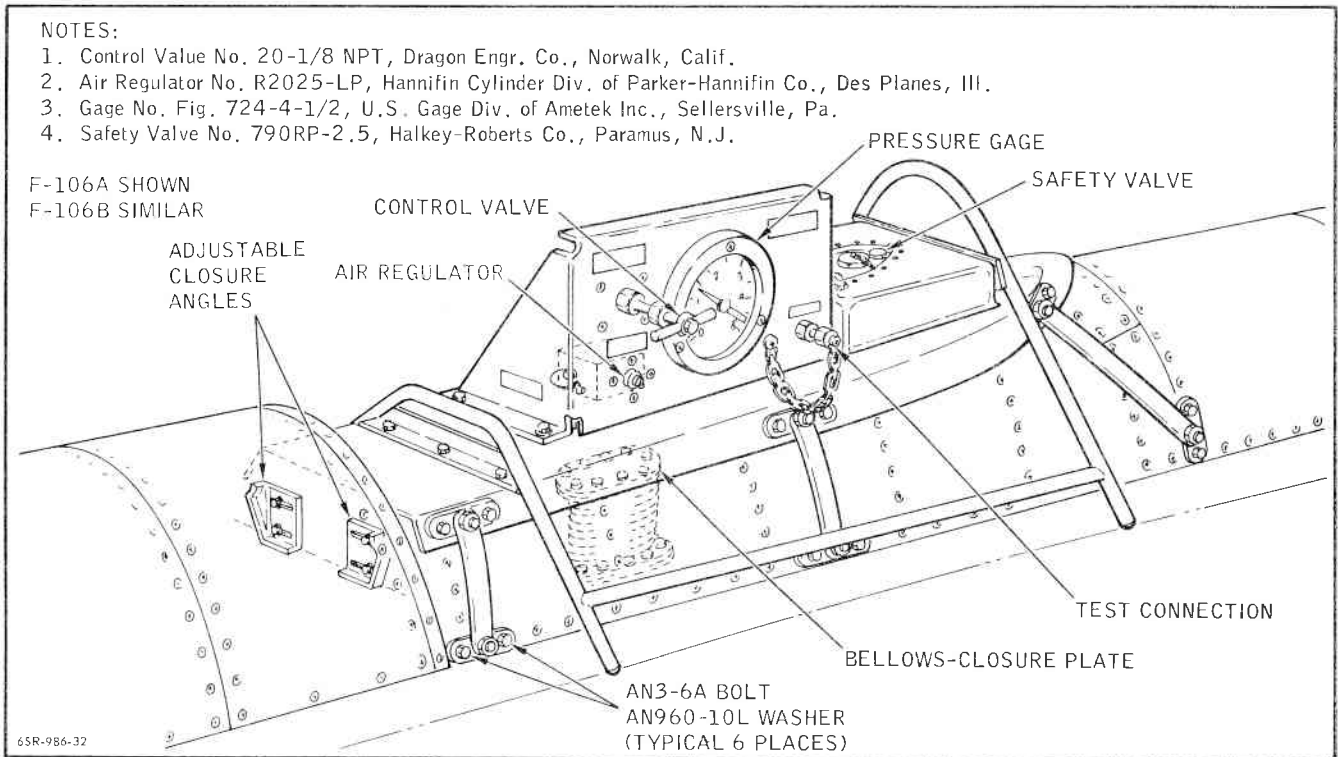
A. Aerial Refueling Dorsal Cavity Leak Tester Installation.
